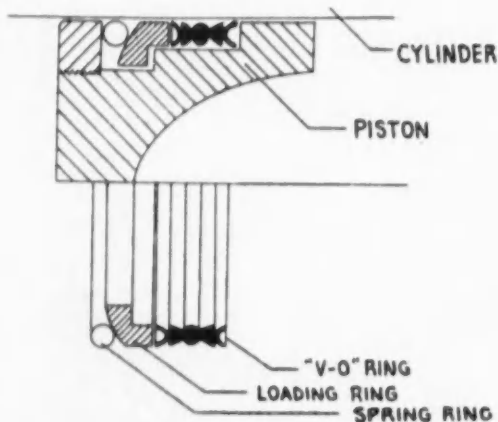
A spring loaded v-o-ring may be used to seal moving glands at temperatures up to about 500 F.
